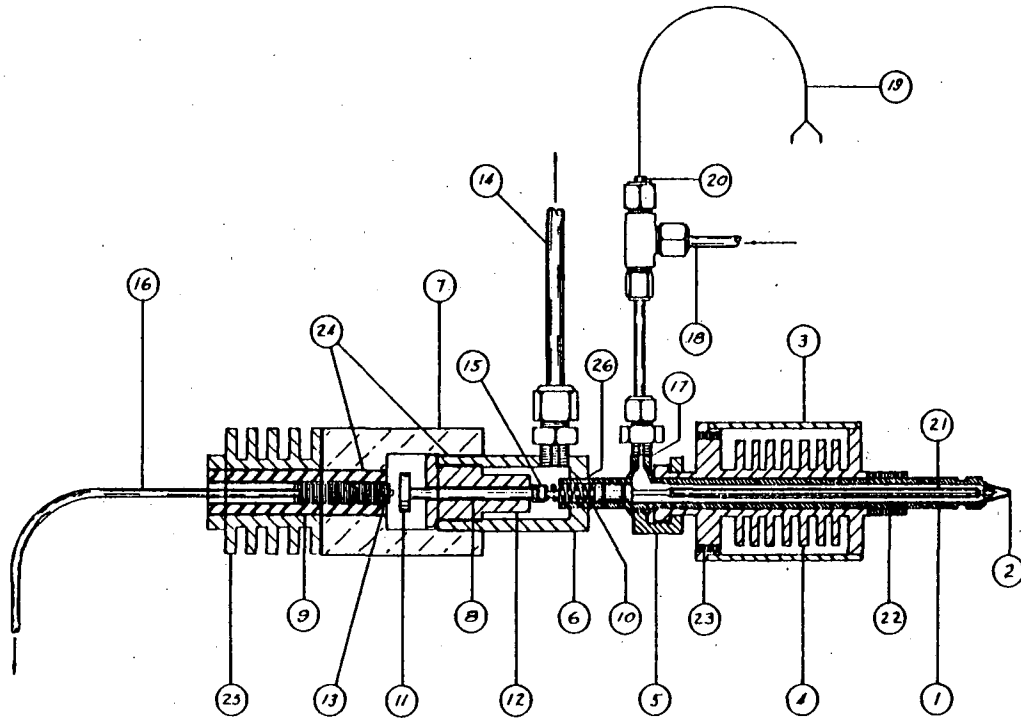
Fuel injector: 1.Stanadyne Roosa Master injector - type 2d671, 2.Injector tip(sack removed), 3.Liquid flow injector cooler, 4.Cooling fins, 5.Retainer clip, 6.Adaptor, 7.Insulator(Macor), 8.Extension shaft, 9.Displacement transducer housing, 10.Injector tension spring, 11.Displacement transducer target, 12.Spring cap and extension shaft bushing, 13.Displacement transducer: Kaman KD2300 Proximity Sensor, 14.Fuel weep outlet, 15.Adjustment shims, 16.Displacement transducer output cable, 17.Fuel inlet mount, 18.Fuel inlet tube, 19.Thermocouple lead, 20.Teflon plug seal, 21. Thermocouple sensing junction, 22.Injector mount, 23.Coolant liquid inlet and outlet, 24.Threaded housing connectors, 25.Cooler for displacement transducer, 26.Press fit (class fn4) connection
